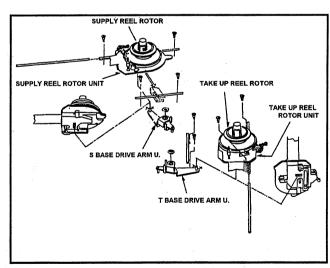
Installation of S & T Reel Rotor Unit
